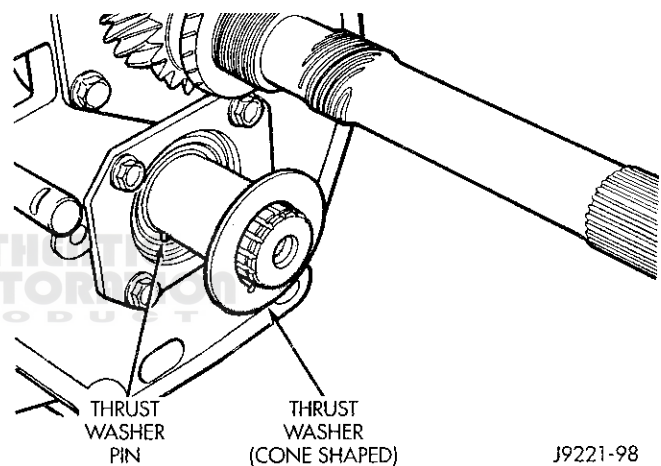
Countershaft Rear Bearing Thrust Washer Removal
